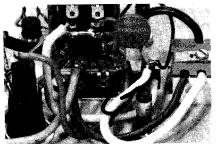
MAKE CERTAIN THAT ALL components and wires are securely soldered to a terminal. No components should "float," and no wires should have in-line splices. Such construction will help ensure glitch-free operation for your computer.
